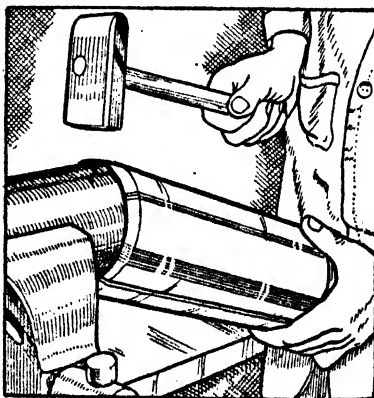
(left).—*FORMING FLANGE—FINAL OPERATION
